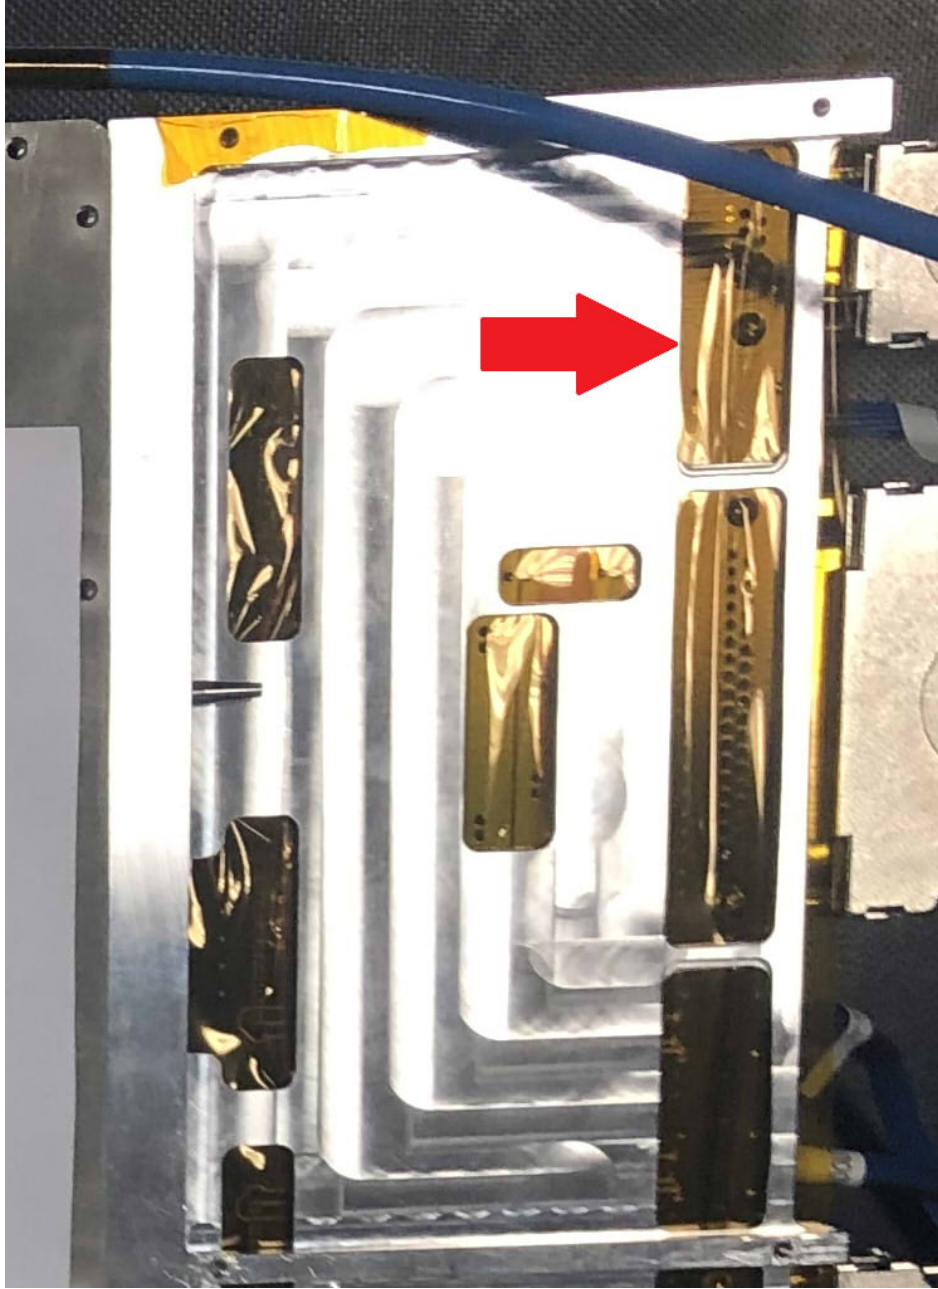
Kapton tape applied to the underside of a patch panel, preventing contact between soldered pins and the aluminum frame.
